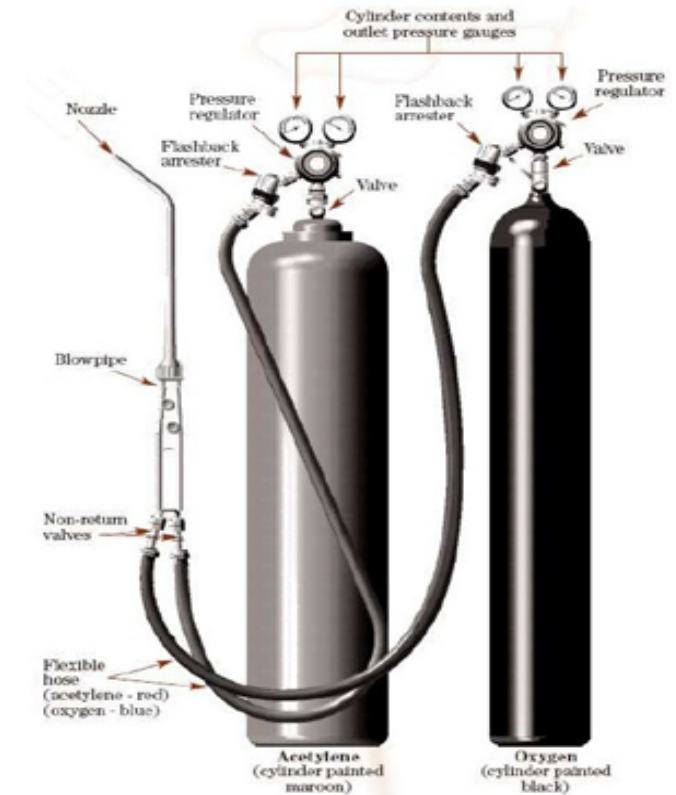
Oxy-acetylene welding unit with flashback arrestors. Source: <https://www.metals4u.co.uk/how-to-oxy-acetylene-weld.asp>
